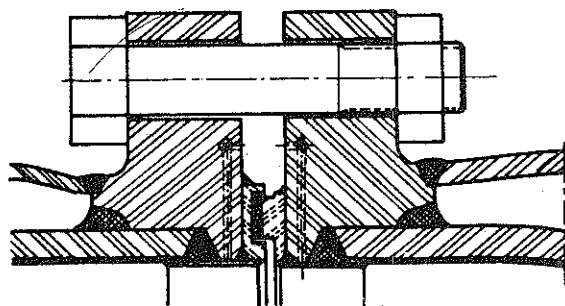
Stainless steel lined flanged joint of a reaction vessel with jacket for shell and head, welded to flanges
